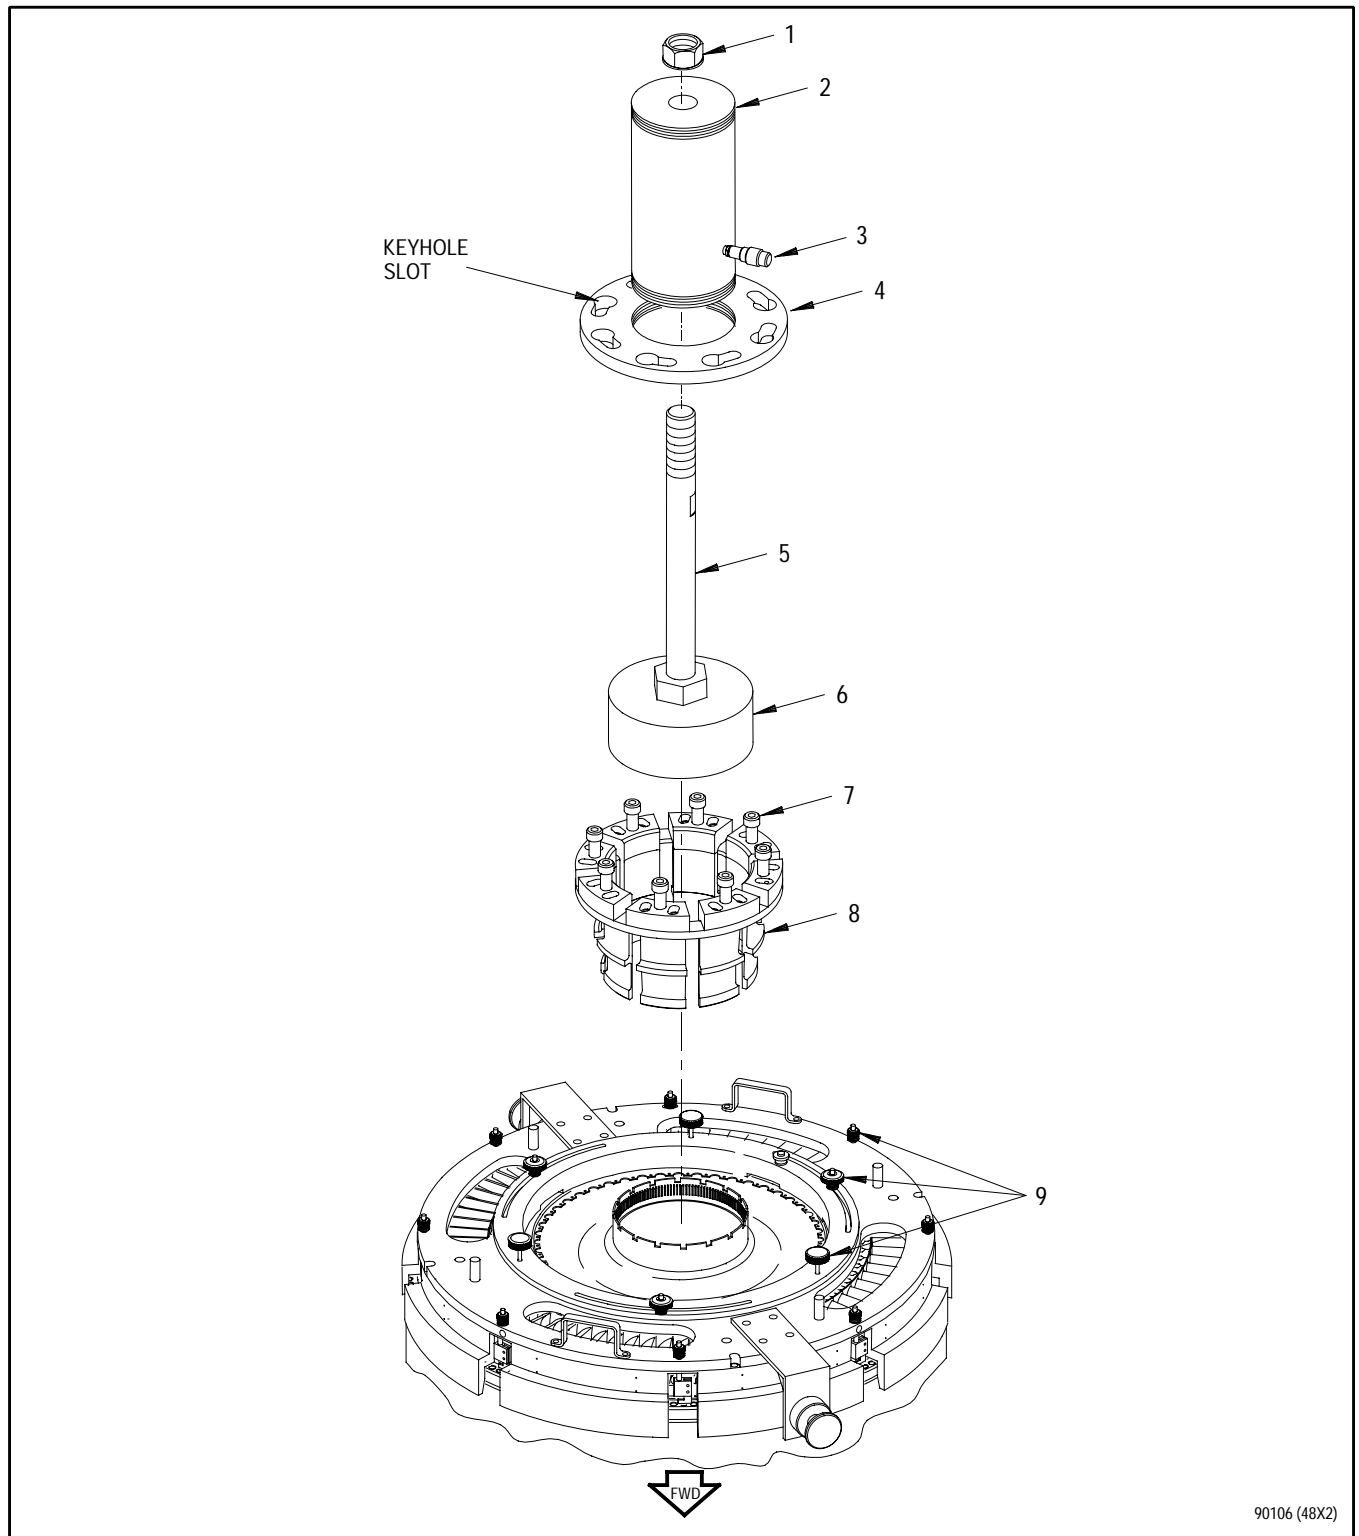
Rear Compressor Drive Turbine Rotor and Stator - Seating with Hydraulic Pusher
